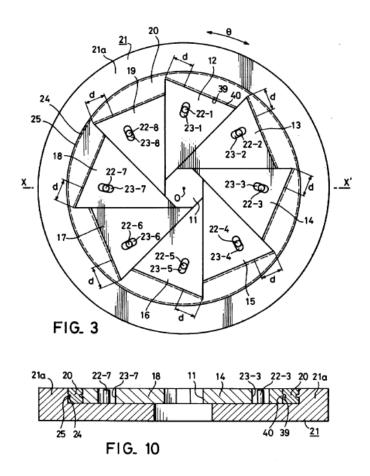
is a plan view illustrating the aperture setting device and Figure 10 is a sectional view of the same. Ex. 1103, 2:1–3, 2:39–40. As shown in Figures 3 and 10, guide groove 39 is cut in the inner peripheral surface of
